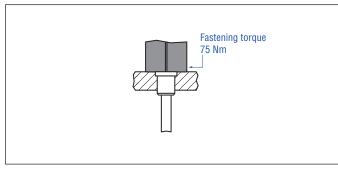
Mounting example of threaded flange »F«, »M«, »S«, »W«
